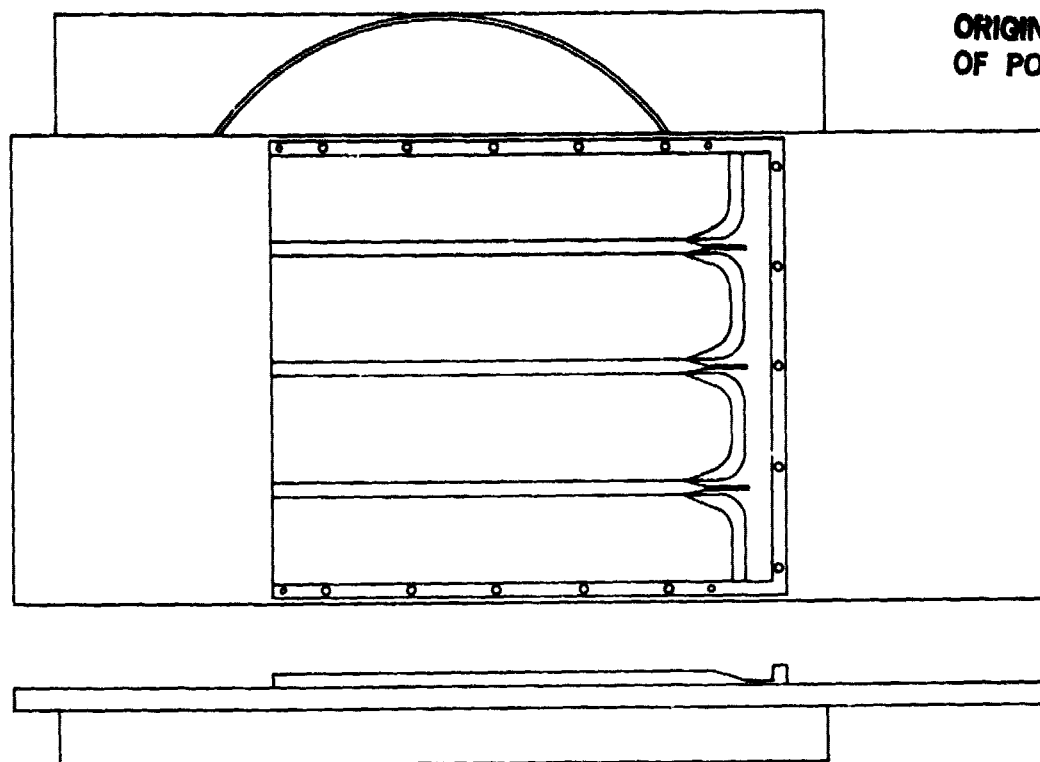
4-ft long panel as positioned on base plate and machine table.
